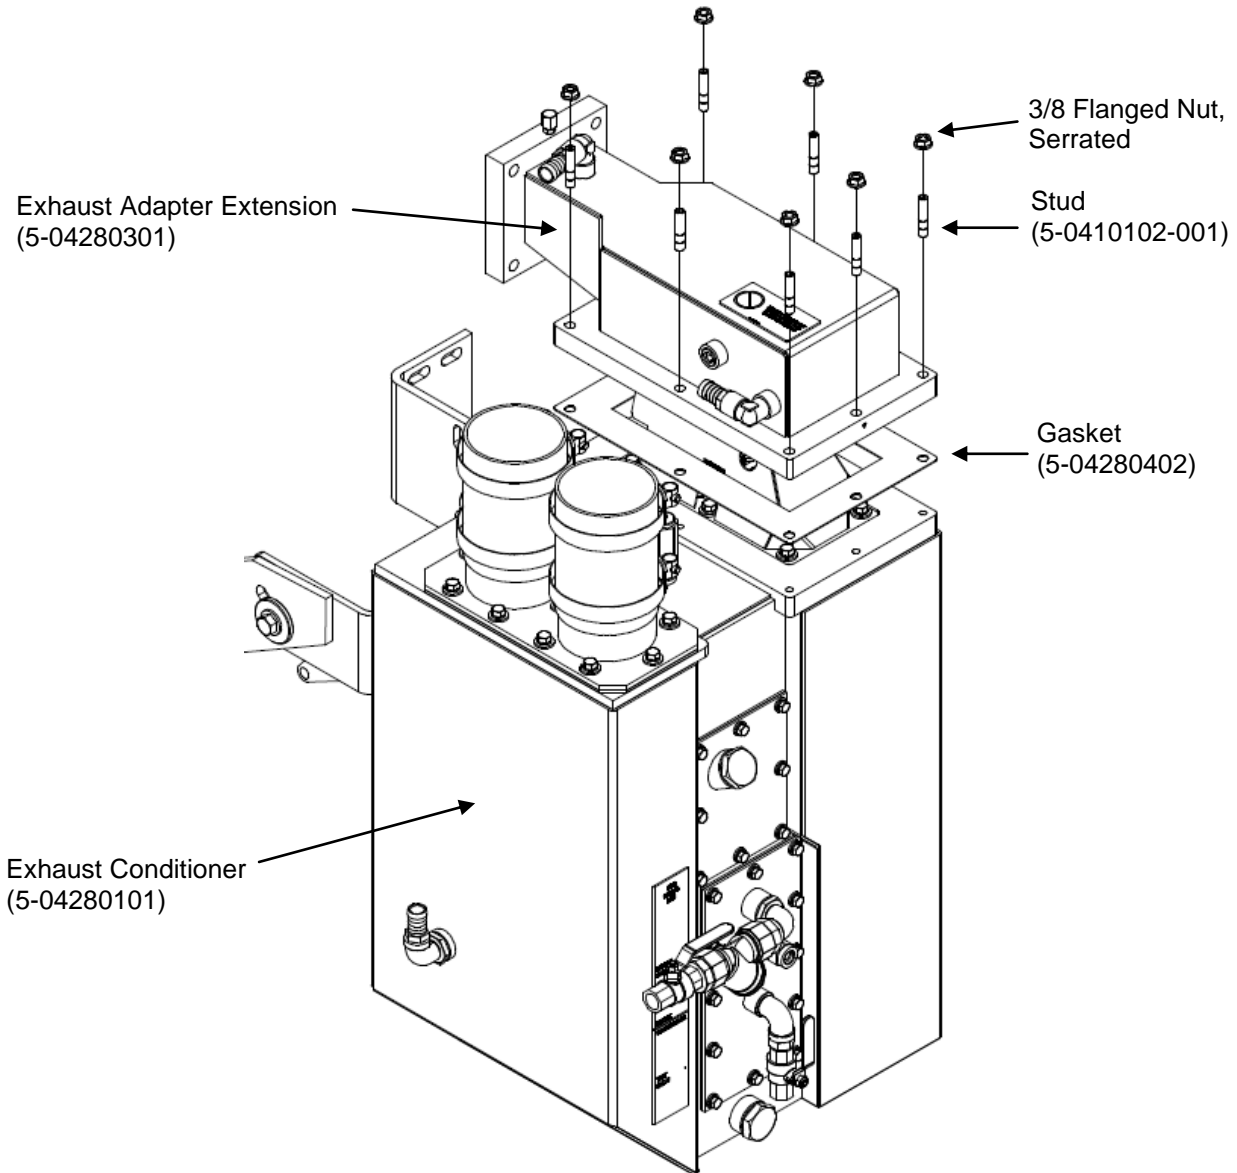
MDR090376DES Exhaust Conditioner Assembly
